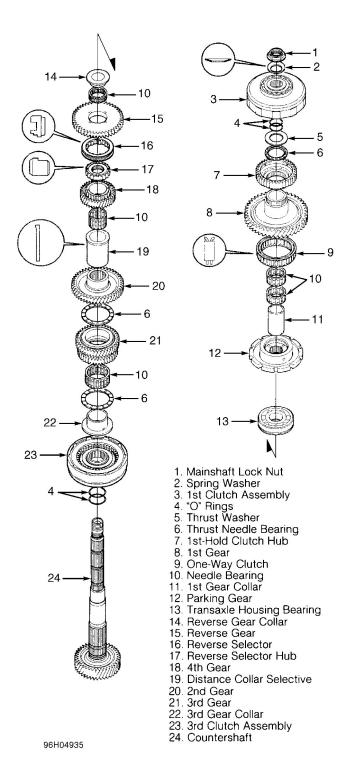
Assembling Countershaft For Checking Countershaft 4th Gear Clearance Courtesy of AMERICAN HONDA MOTOR CO., INC.
